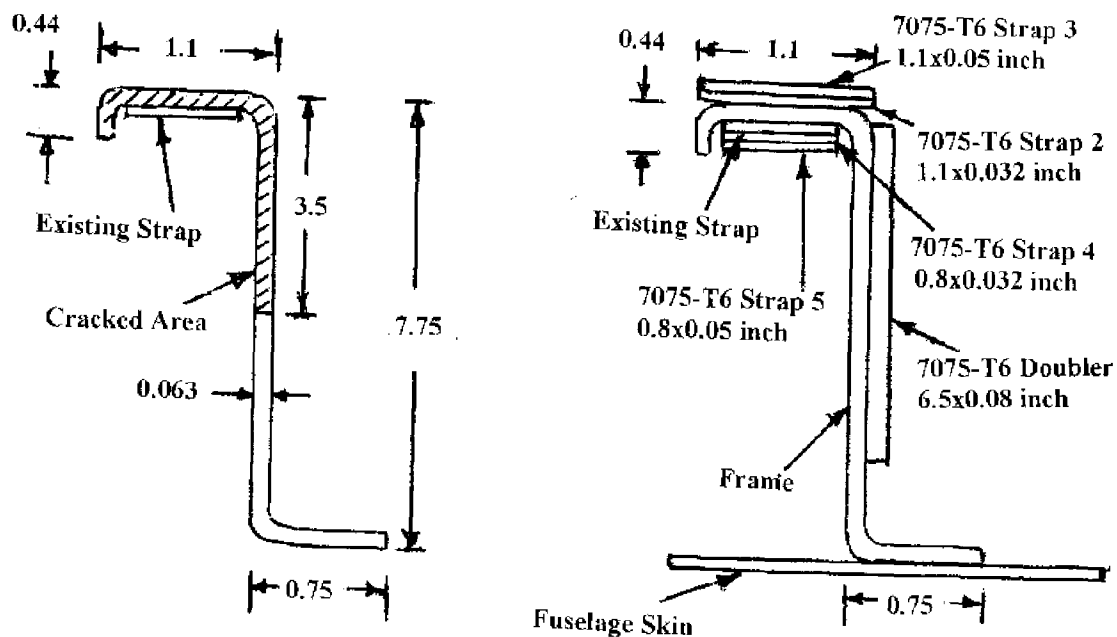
Section Showing Cracked Frame Figure 6b. Section Showing Flange and Web Repairs
